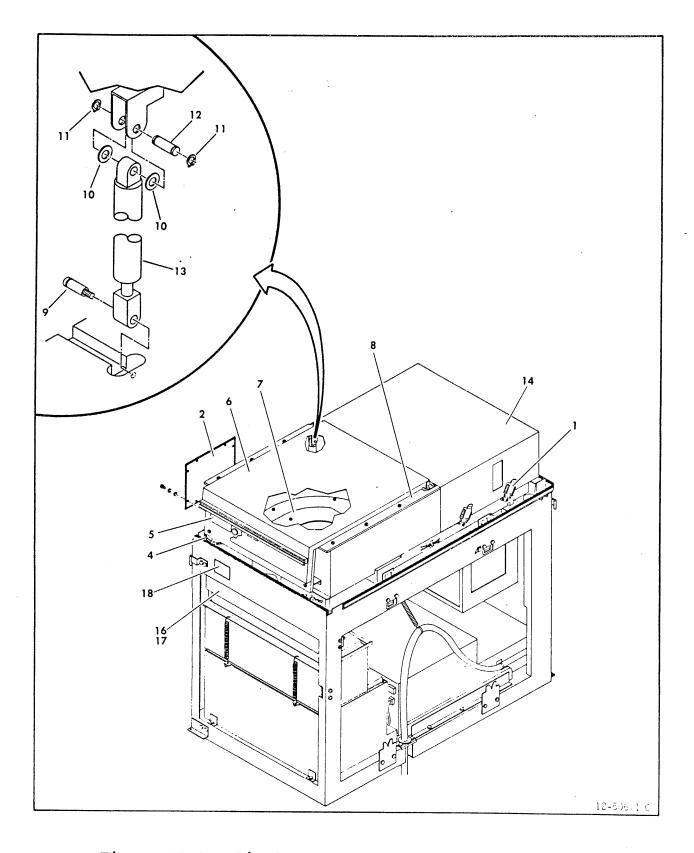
A-5. Final Frame Assembly (Sheet 1 of 3)
